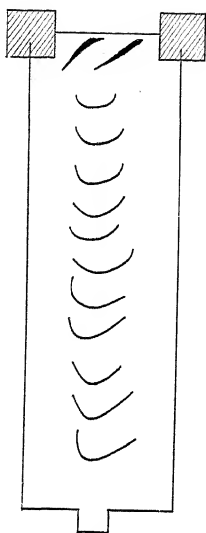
SKETCH OF INGOT FROM WHICH THE PRINT SHOWN IN FIG. 3 WAS TAKEN.
